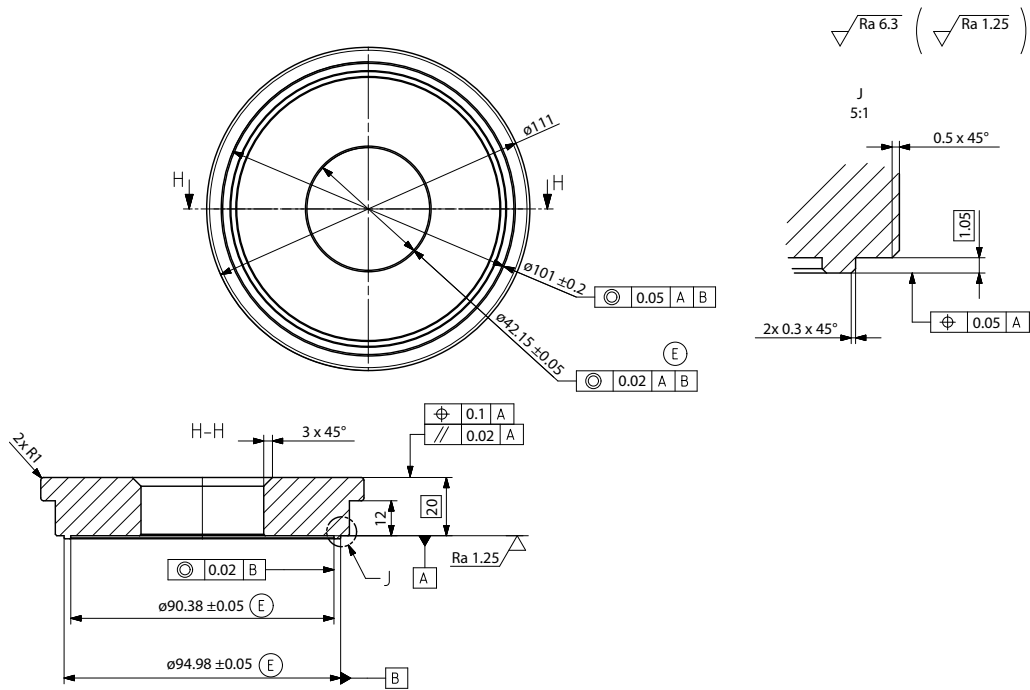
Pressing tool for needle bearing (4 of 4) - OMR center plate
